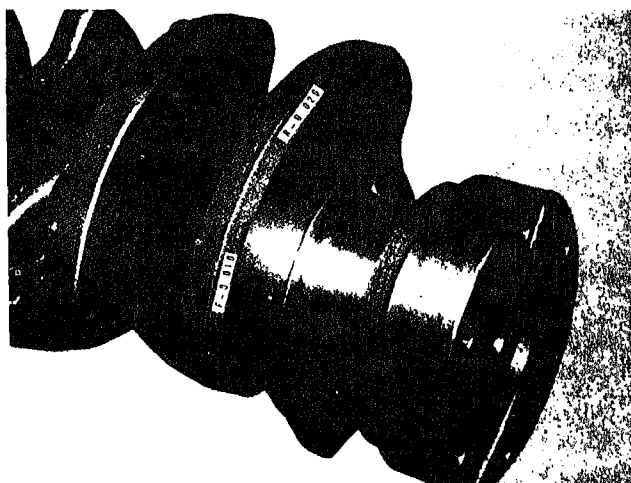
Oversize thrust bearing size mark on crankshaft
